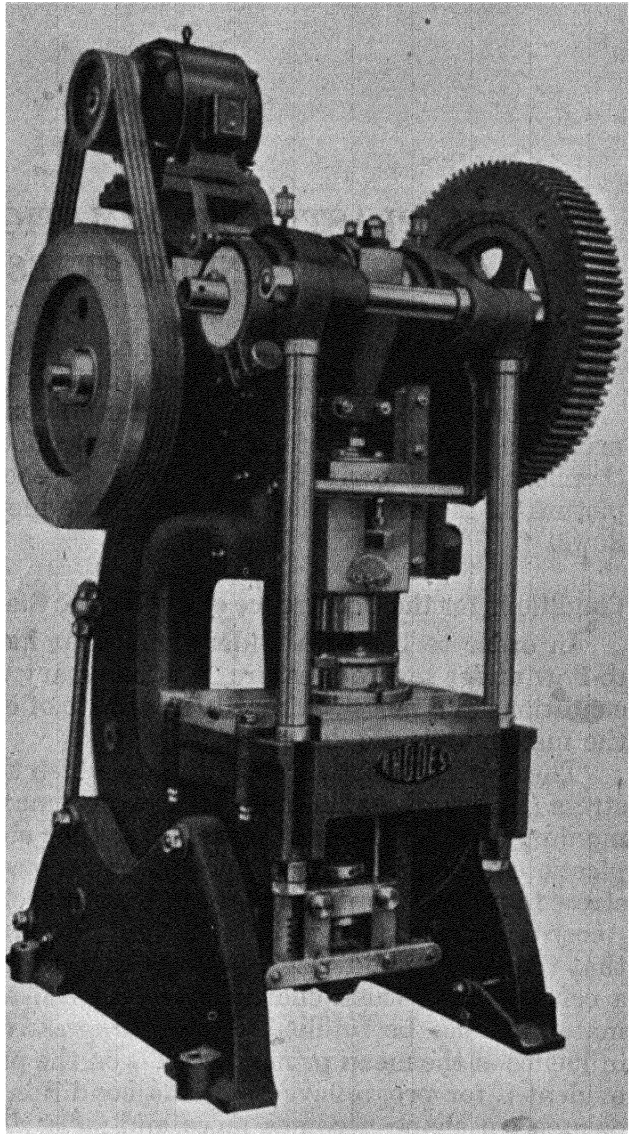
The “SIMPLEX” DEVICE FITTED TO THE RHODES No. B3 $\frac{1}{2}$ OPEN-FRONTED PRESS, MAKING IT SUITABLE FOR GENERAL BLANKING, PIERCING, BENDING, AND DEEP DRAWING
